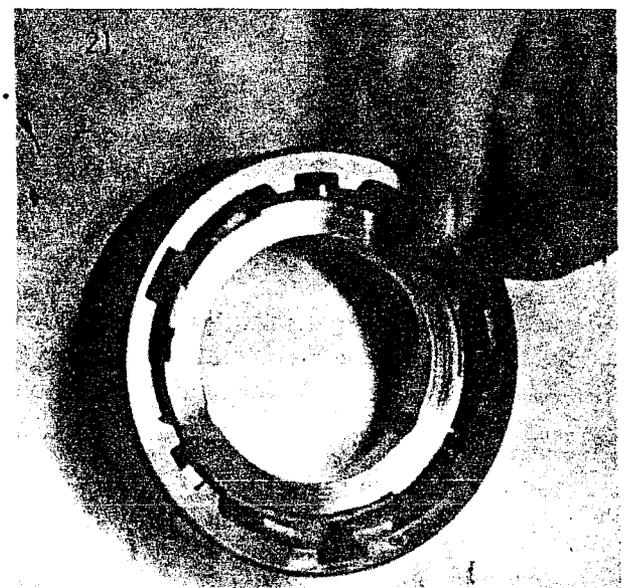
Insert the sliding sleeve in the shifting fork and measure the axial clearance of the sliding sleeve. The axial clearance below the wear limit must be 0.1 - 0.4 mm.
